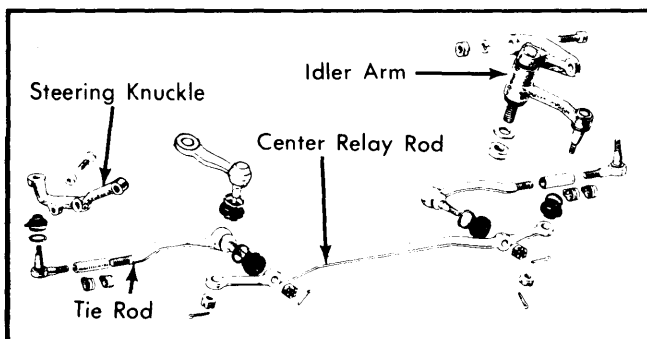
Toyota Steering Linkage with Bushings and Retainers (Typical Illustration)
